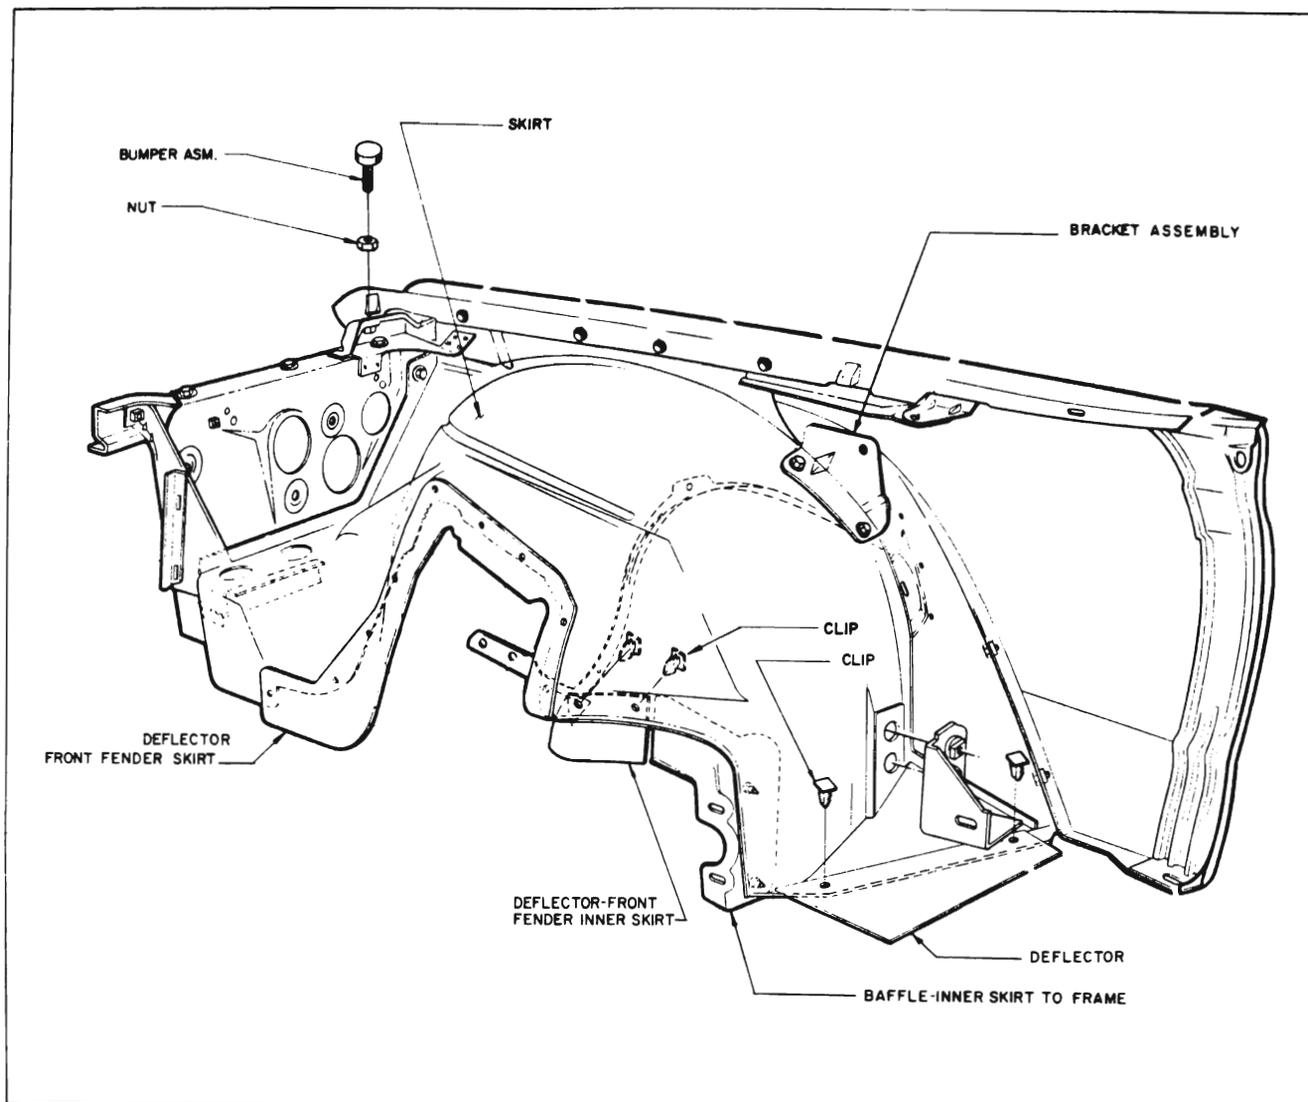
Front Fender Skirt Assembly—4400-4600 and 4800 Series
